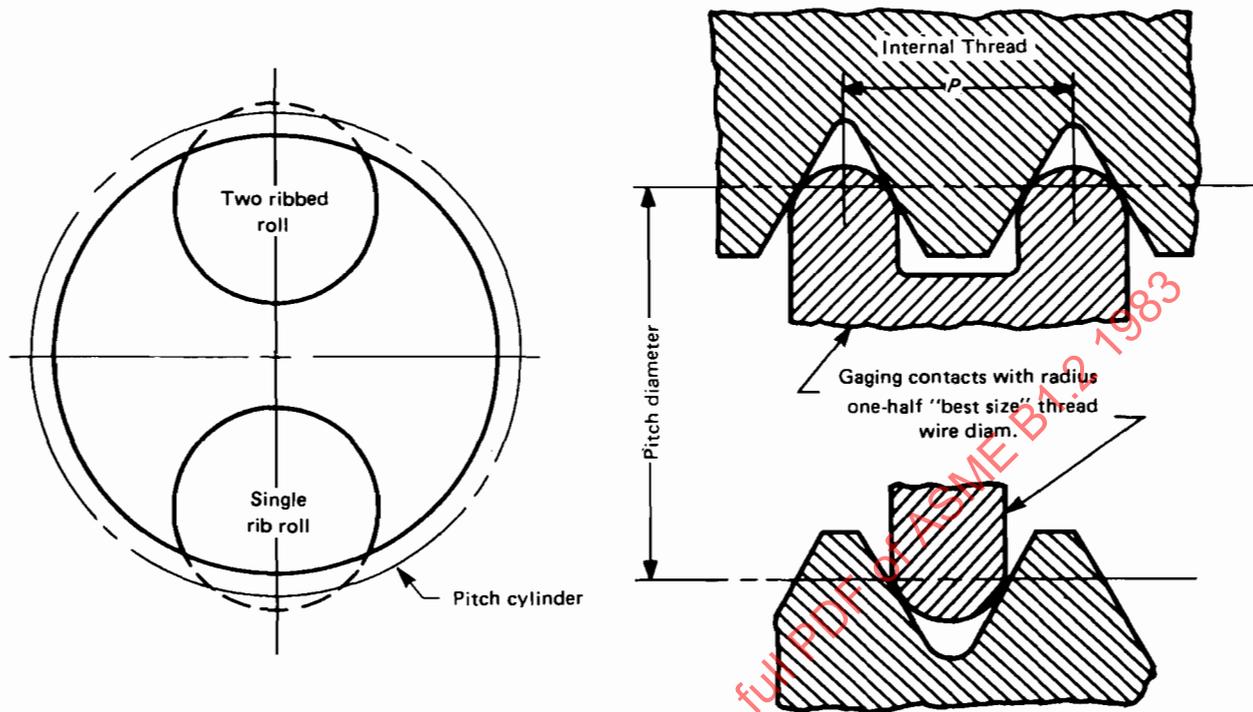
THREAD SNAP GAGES — MINIMUM-MATERIAL THREAD GROOVE DIAMETER LIMIT
